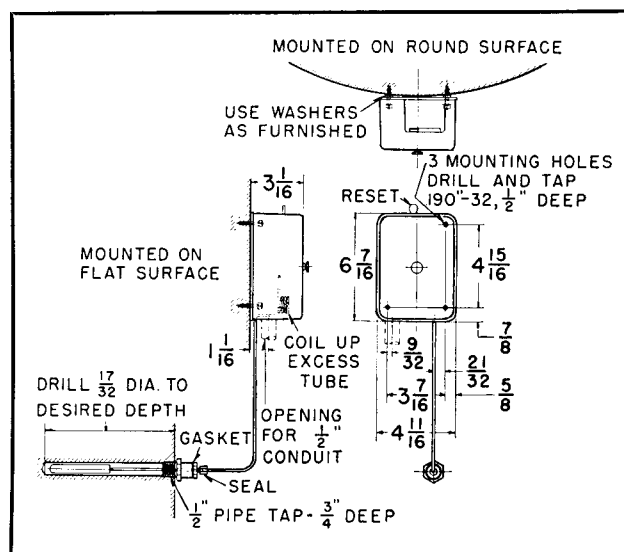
Details for Mounting Type HQ Relay on Transformer Tank (Approximate Dimensions are Shown for Reference Only)
